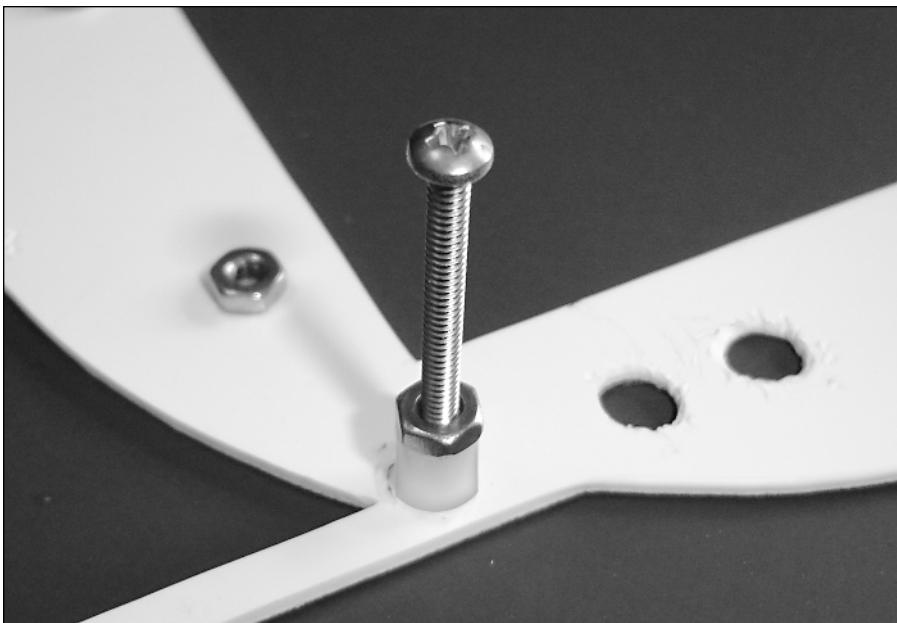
Attaching the size-4 nuts to nylon spacers.
